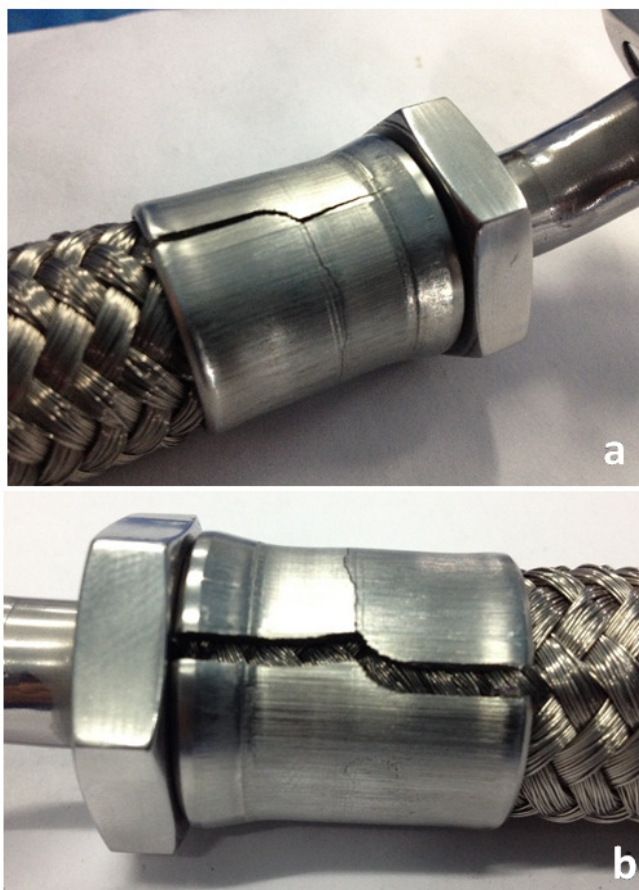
Digital photograph showing the cracking of sleeve in hydraulic pressure set up (a), and after removal from the set up (b)
